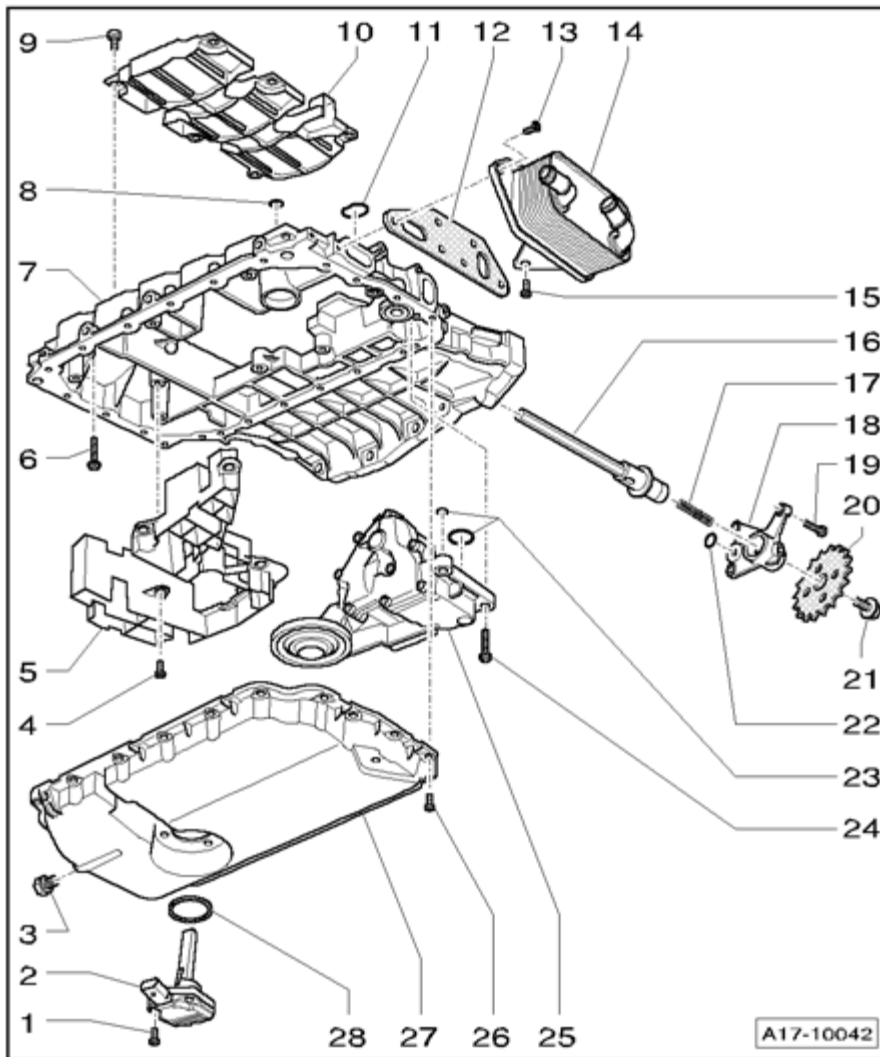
Oil Pan Sections, Oil Pump And Oil Cooler, Component Overview
